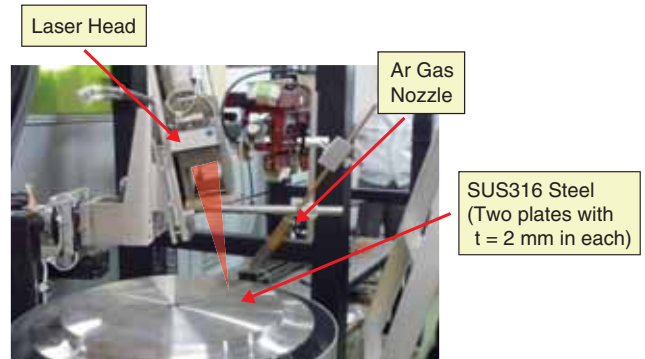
Validation tests of the welding and cutting by a fiber laser
